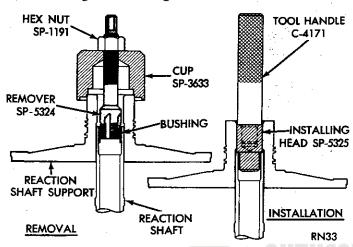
Replacing Reaction Shaft Support Bushing — A-998/999
